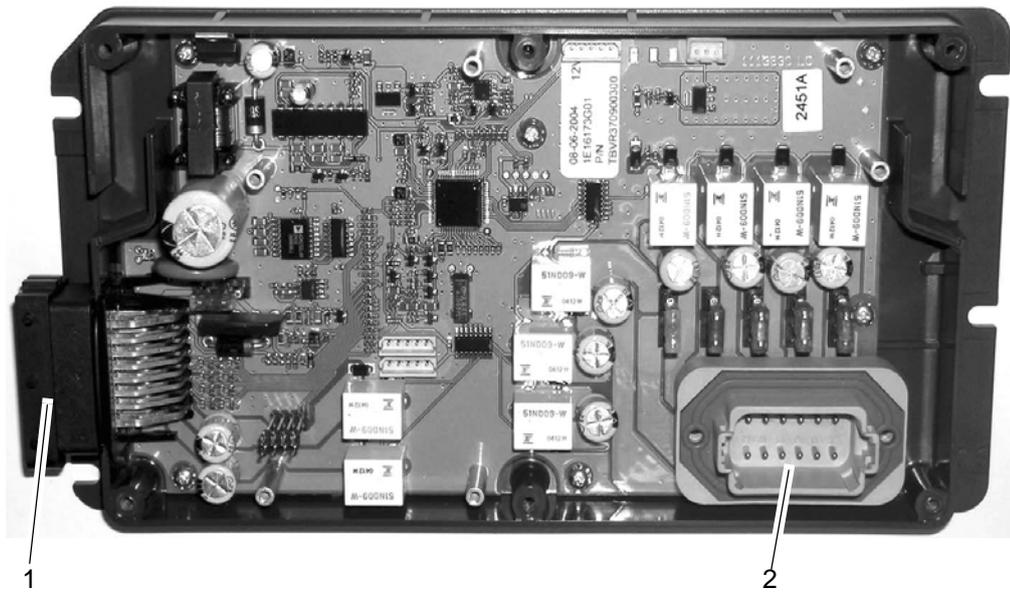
Internal Layout of a Platform 1 Electronic Control Module, showing PCB 1
